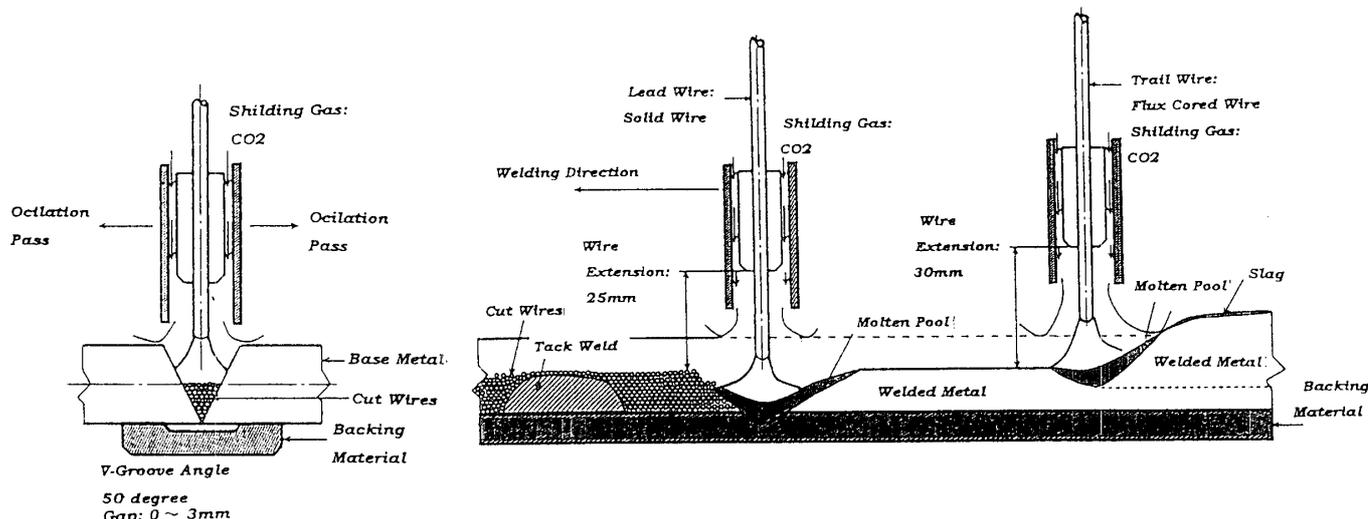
Schematic Diagram of one-side Gas Metal Arc Welding Procedure
